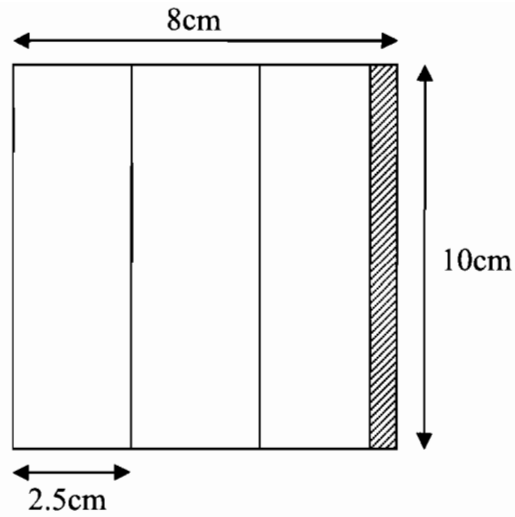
Three standard cutting specimens (Dimensions: 0.25×2.5×10cm) from the sheet of the cutter mill sample molded by method B.
